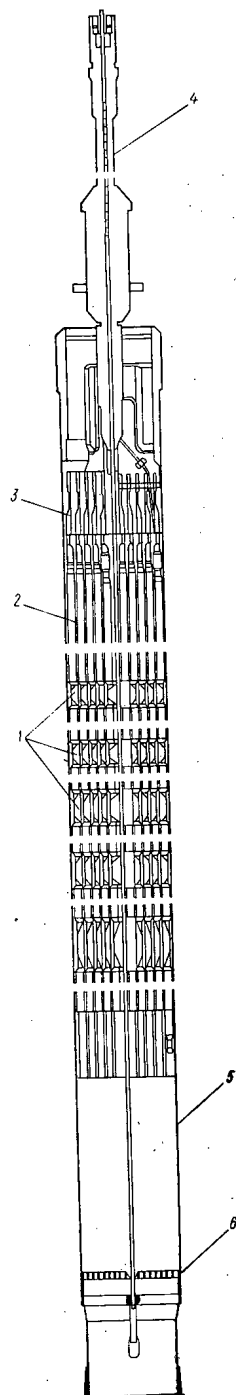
Assembly of fuel elements with spacing sleeves: 1) spacing sleeves; 2) fuel rods; 3) head; 4) thin shaft; 5) shield; 6) trap.
